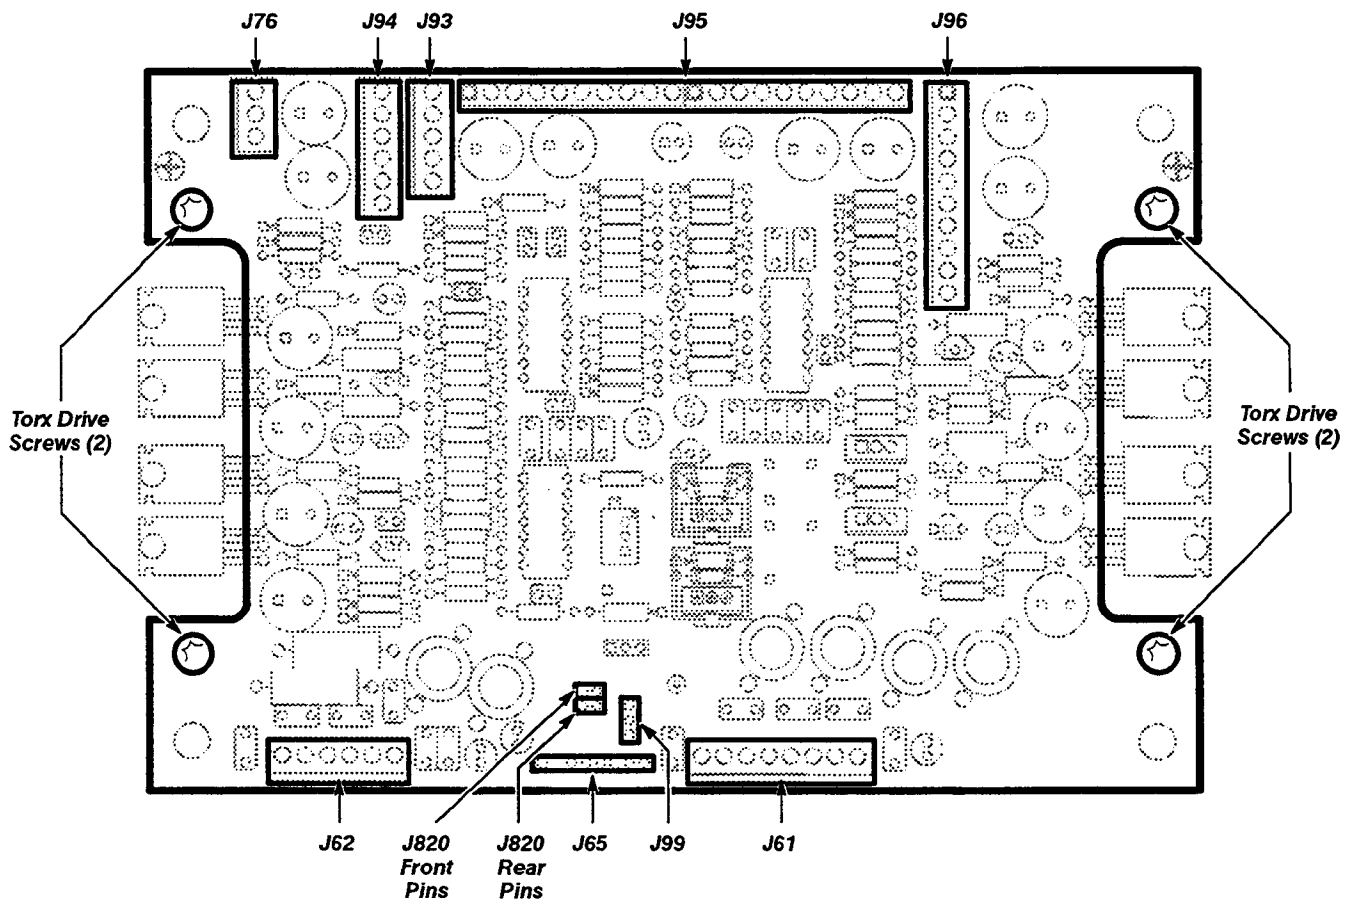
Removing/Replacing the A4 Regulator Board
